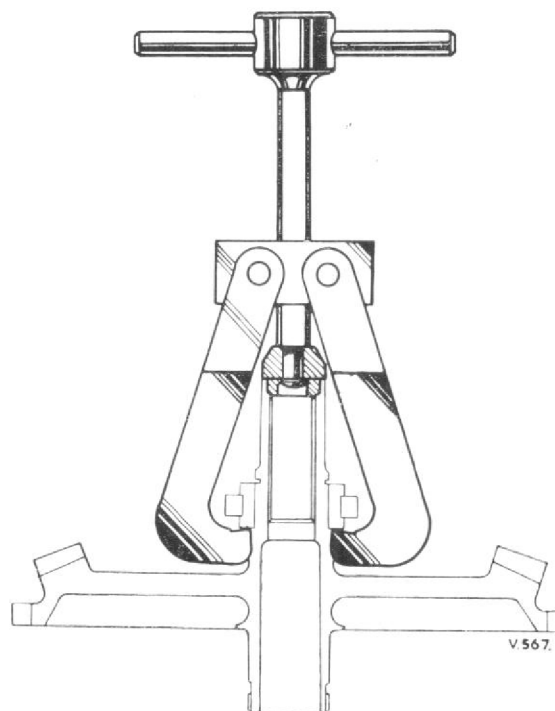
Extractor T.77966 for removing hydraulic pump/fuel pump inner roller race from gear bearing.
